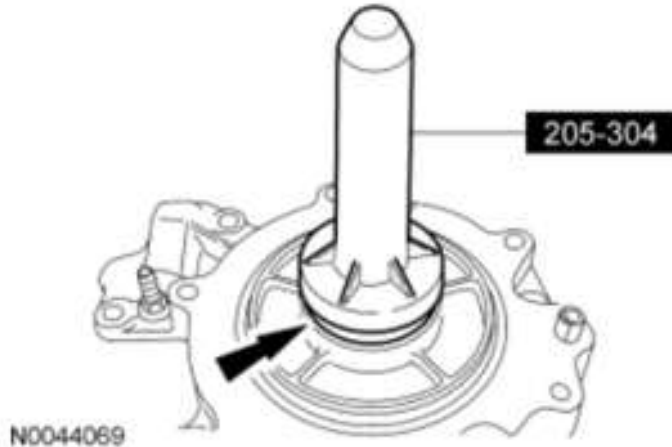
Installing Oil Seal Using Drive Pinion Oil Seal Installer
